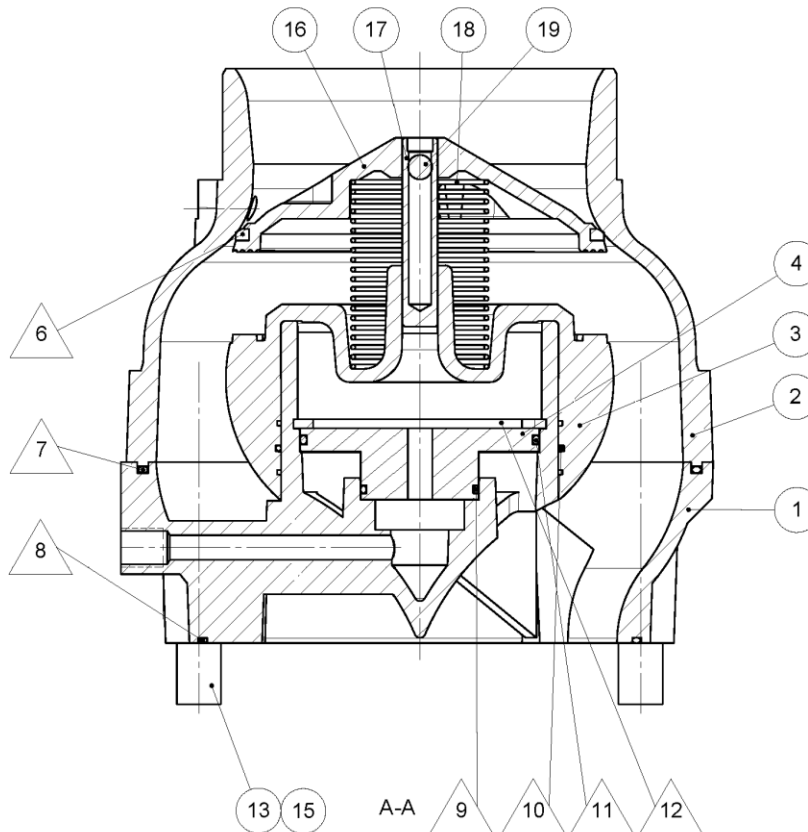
1 – MINIMUM DISCHARGE PRESSURE/CHECK VALVE
